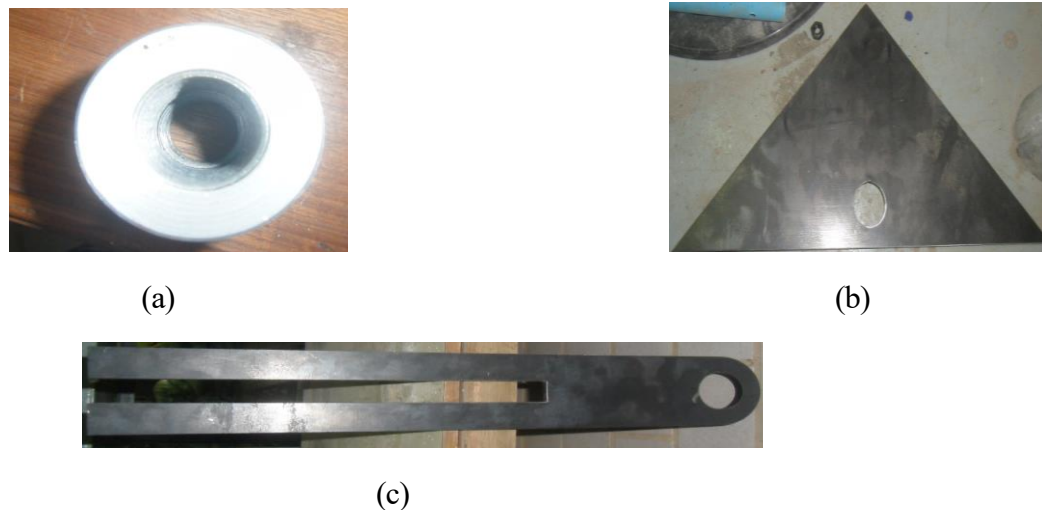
(a) 12mm thick coupler (b) Gusset plate (c) Steel plate for using at the lower portion of bracing
